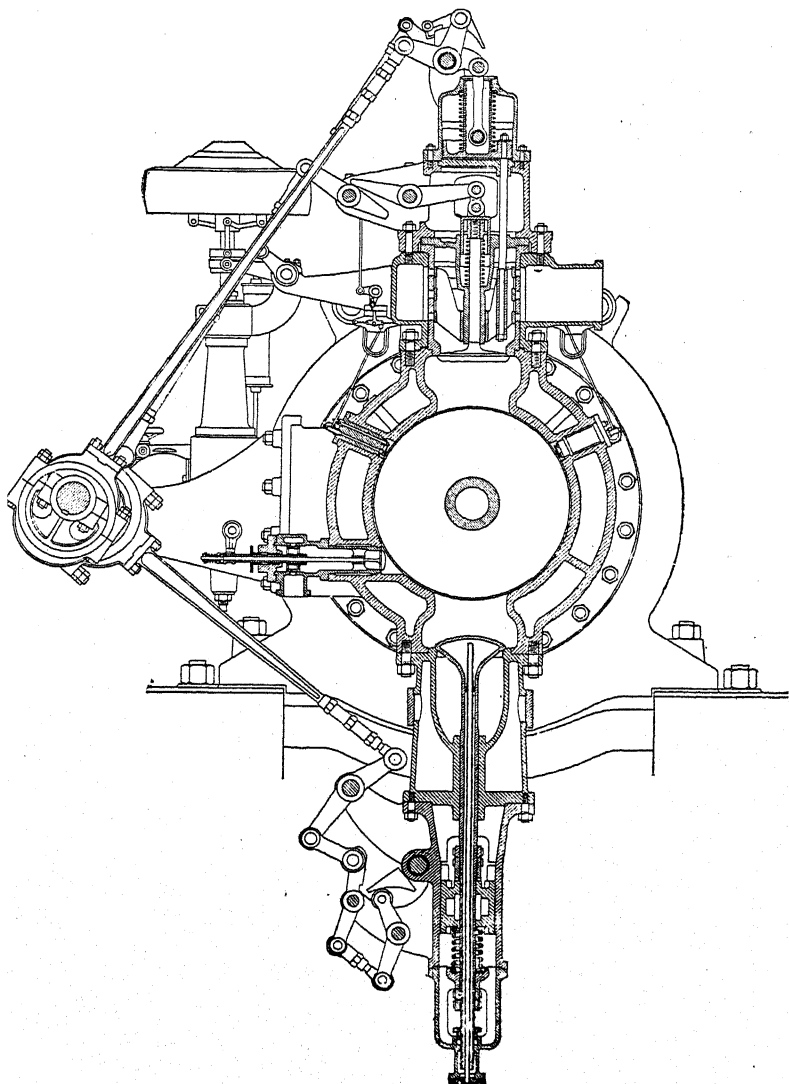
REGULATION OF GAS-CYLINDER OF THE ELSÄSSISCHE MASCHINENBAU-GESELLSCHAFT, MÜLHAUSEN.
